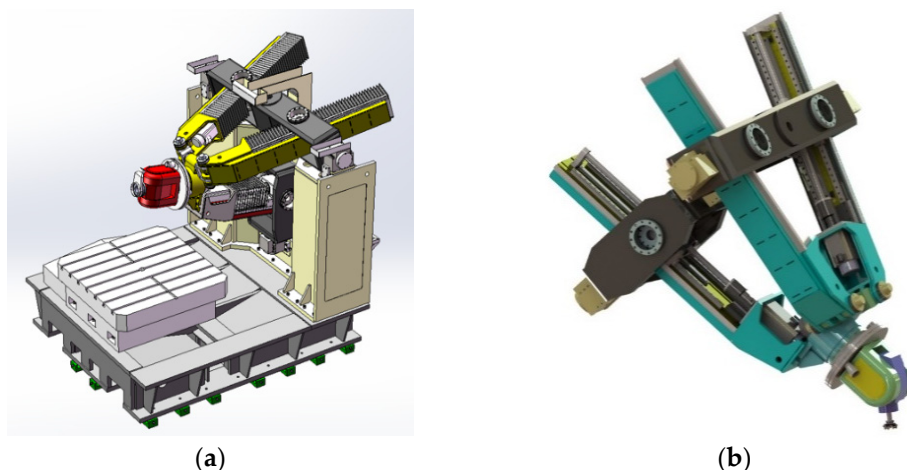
5-DOF hybrid robot [38]: (a) 3D model of the hybrid robot; (b) 2UPU/SP-RR mechanism.
